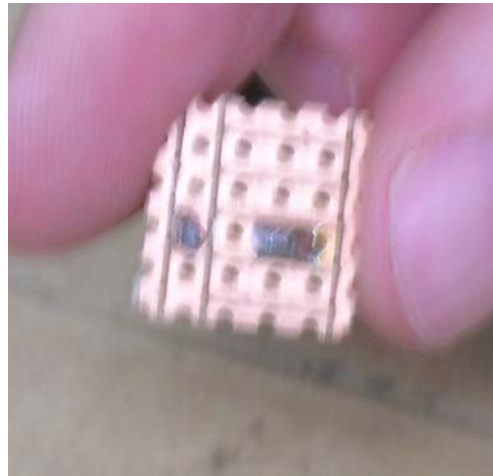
Finished Soldering of Sensing Circuit Capacitor
